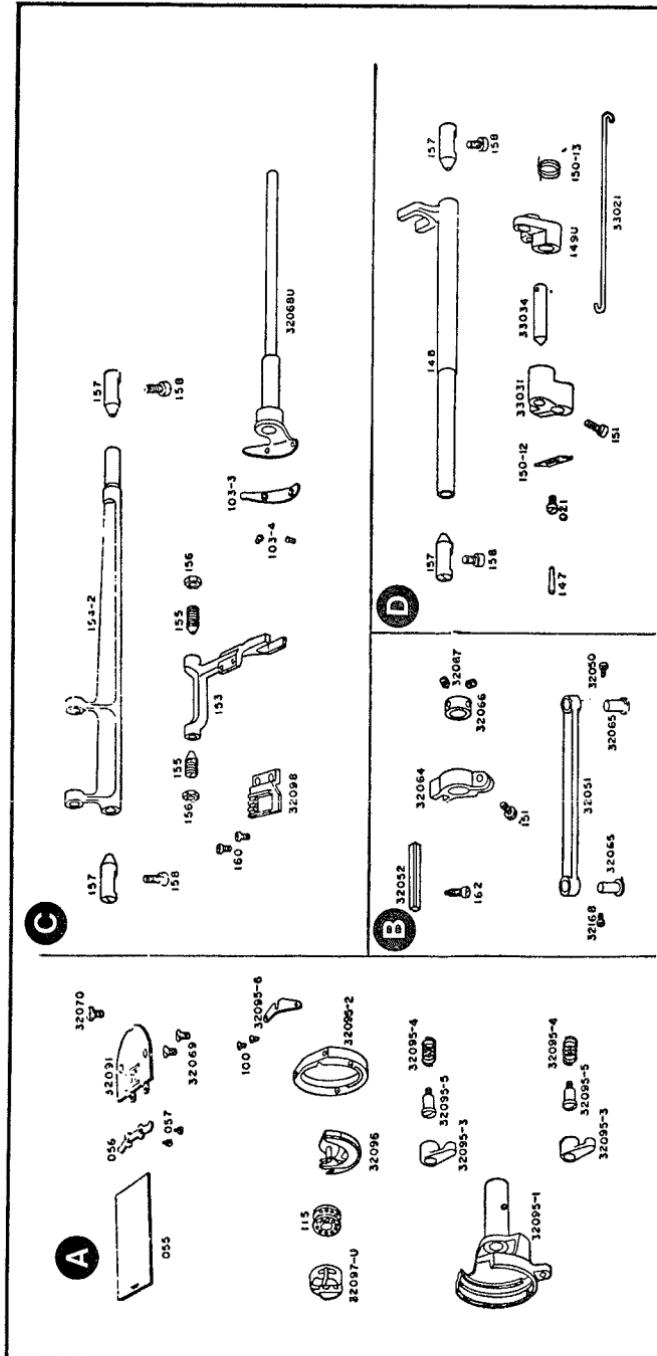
A continuation of the illustrated parts list of the New Home Model 532. For the written parts list refer to Table 6-4. To use the list, find the part in the illustrated list and take its number to Table 6-4 for the descriptive name of the part.
